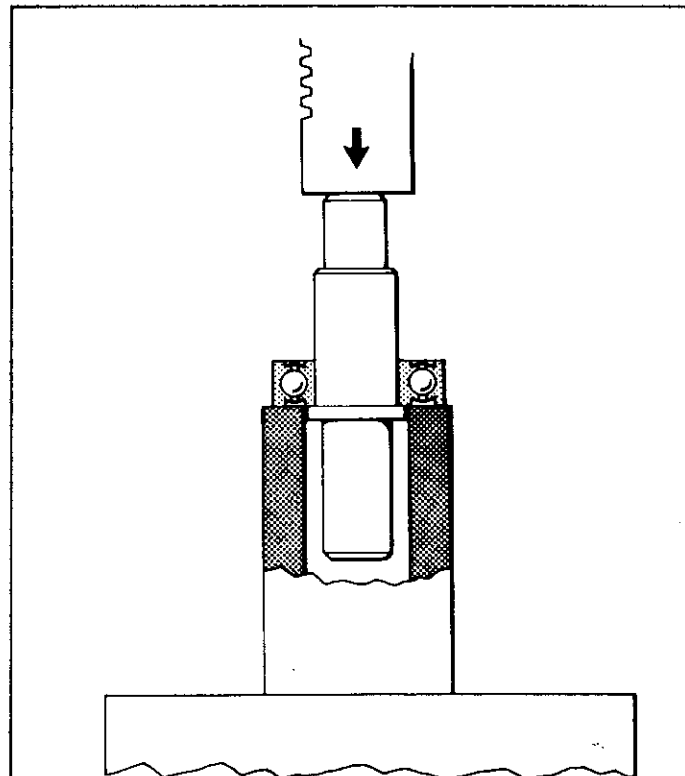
Pressing Drive Shaft from Bearing
